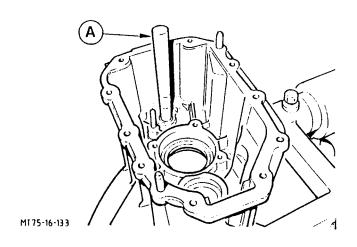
Fit main selector shaft ball sleeve. Λ - Special Tool 21-044- Λ
